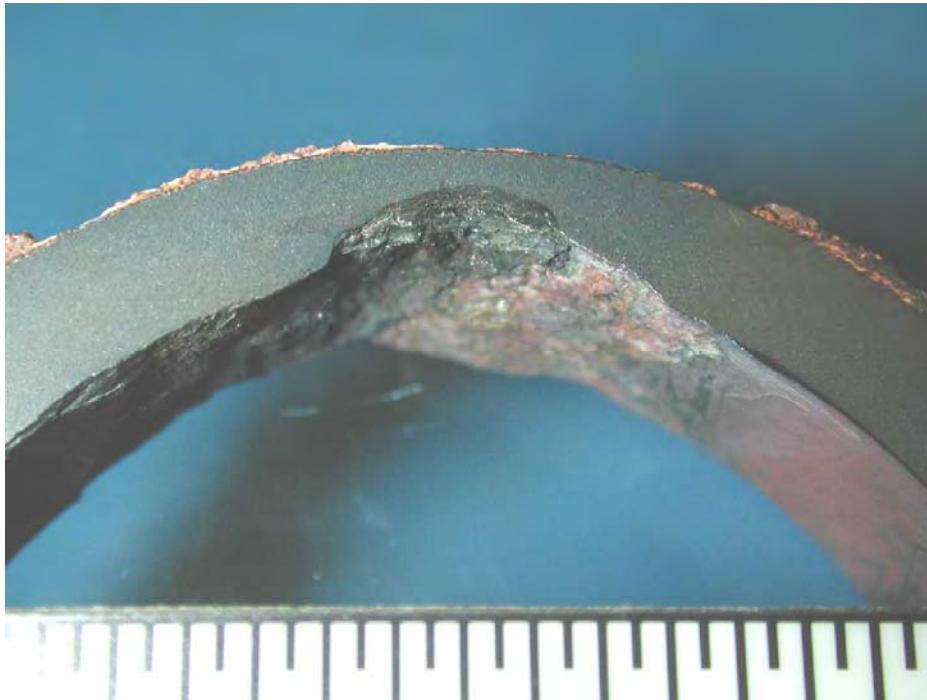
Cross section of tube in Figure 3-14-1 showing localized attack due to caustic corrosion.
